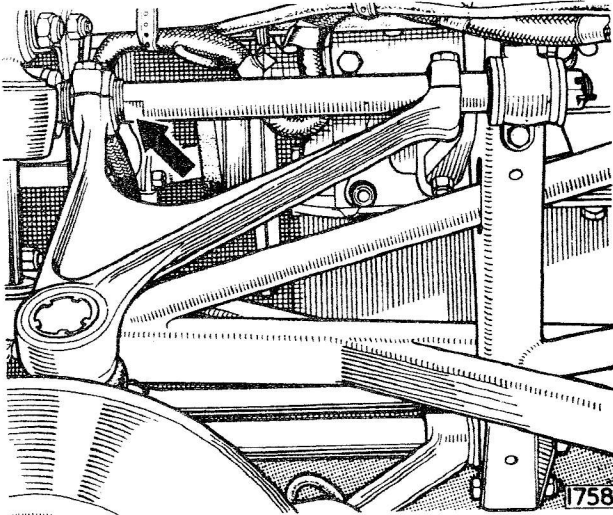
The castor angle is adjusted by rotating the shaft indicated by the arrow.
